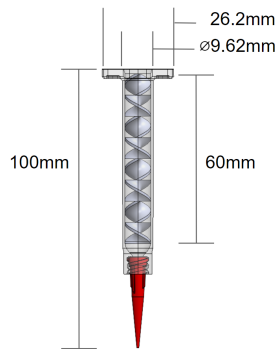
Cross-sectional view of motor syringe subsystem
